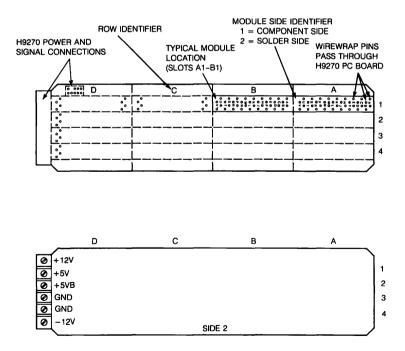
• H9270-Q Backplane Terminal Block (Pin Side View Shown)
